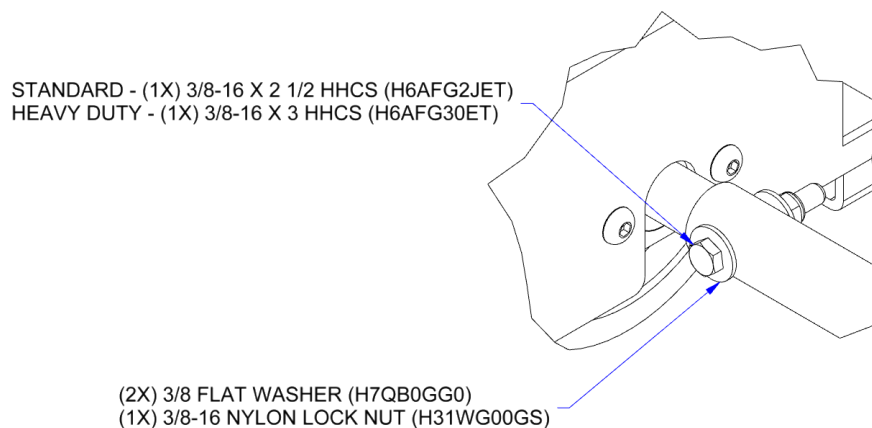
Support Wheel and Hose Clamp
